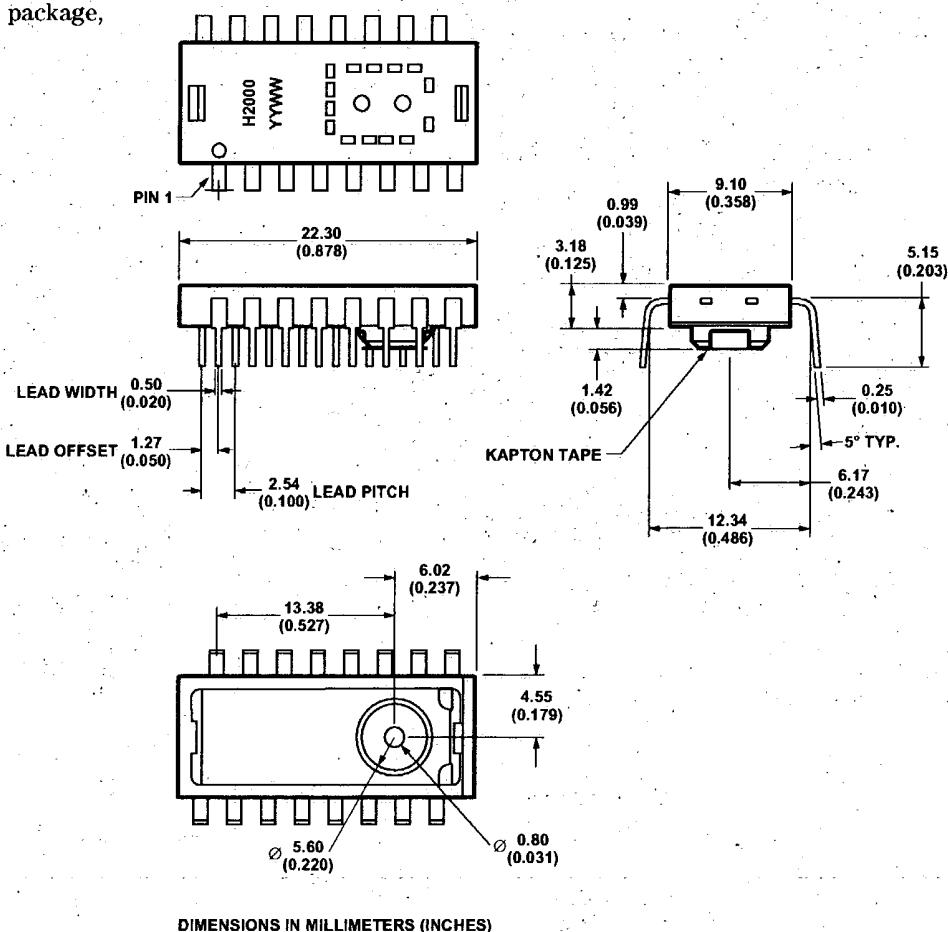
HDNS-2000 Sensor Package Outline Drawing.
